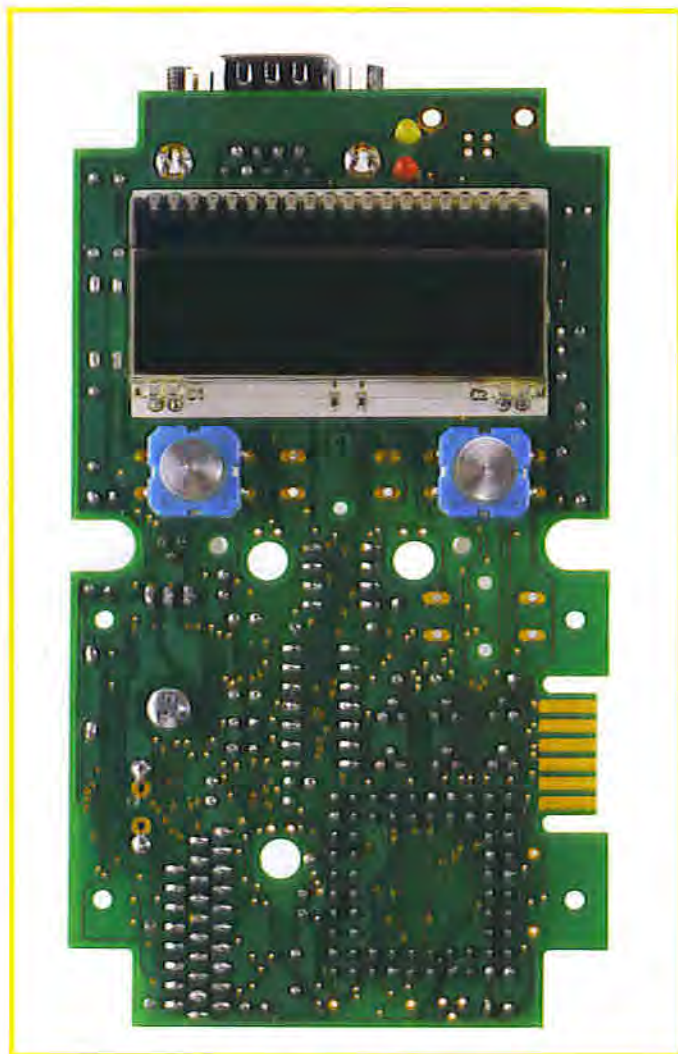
The two push buttons, LEDs and LCD are mounted on the other side of the PCB.
